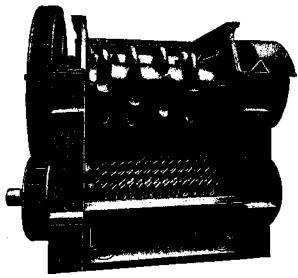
View with Part of Casing removed, showing Breaker Claws
